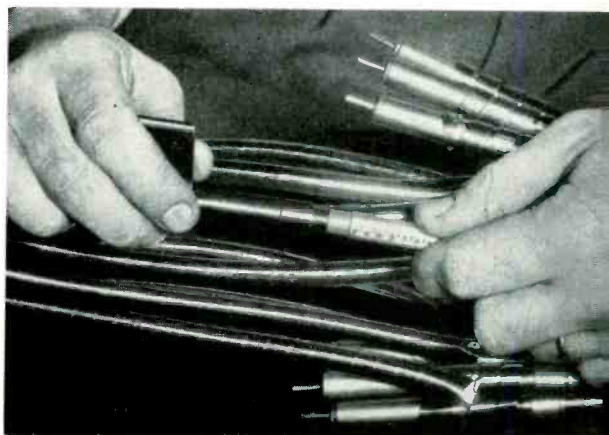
A steel bushing is pushed into the coaxial with a special tool called a coaxial scale
